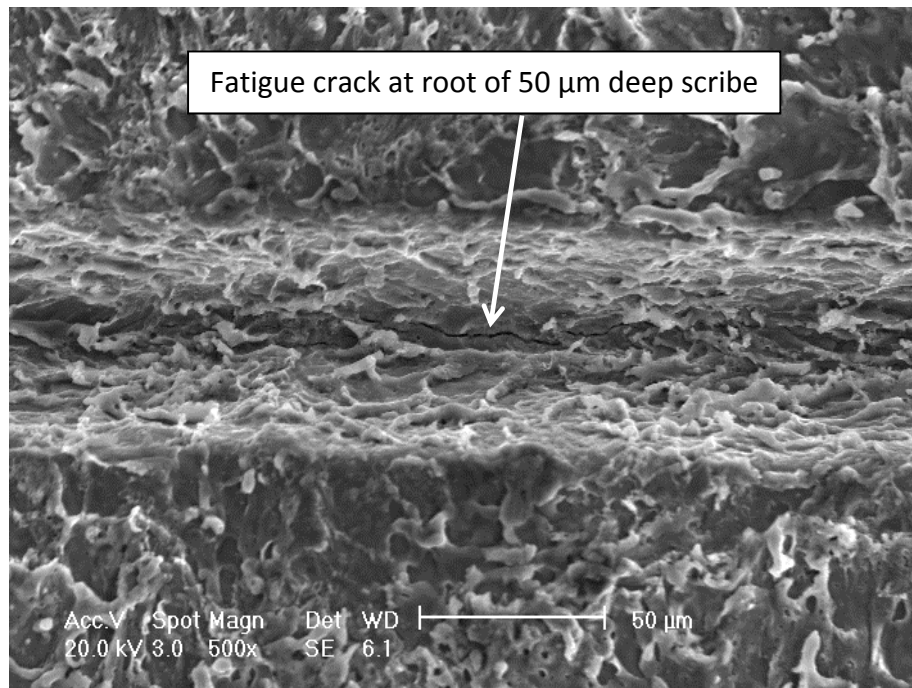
Fatigue crack visible at root of 50 μm deep scribe in sample peened using TOSH LSP treatment after fracture remote from scribe
